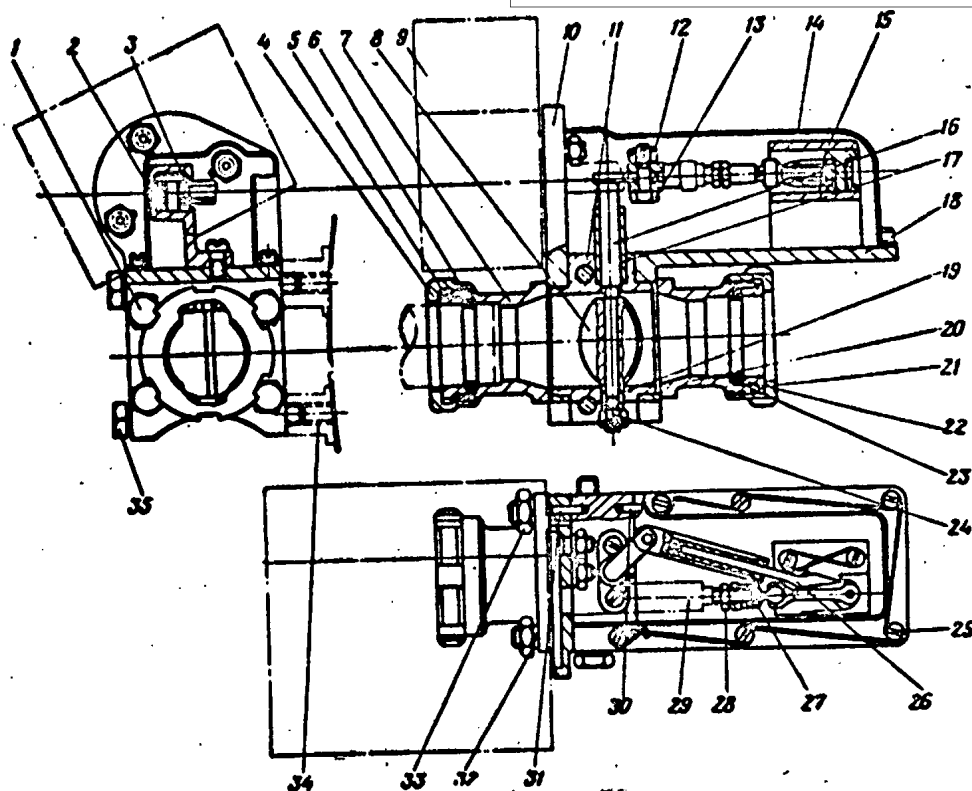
Air bleed valve - 1. Valve; 2. Valve housing; 3. Cover; 4. Nut; 5. Spring washer; 6. Gasket; 7. Piston; 8. Lock washer; 9. Plate; 10. Spring;
